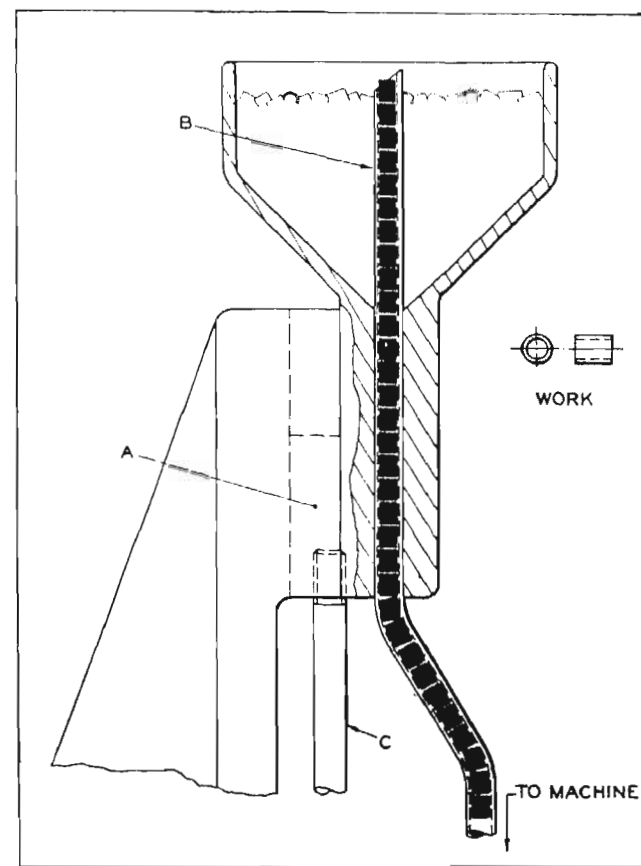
Hopper Employing a Reciprocating Motion to Feed Short Parts through Stationary Tube to Machine.
